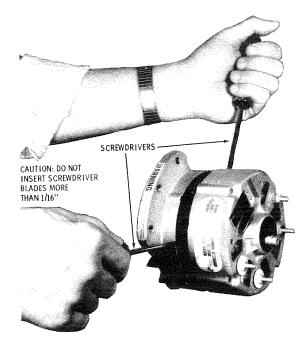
FRONT & REAR HOUSING SEPARATION
